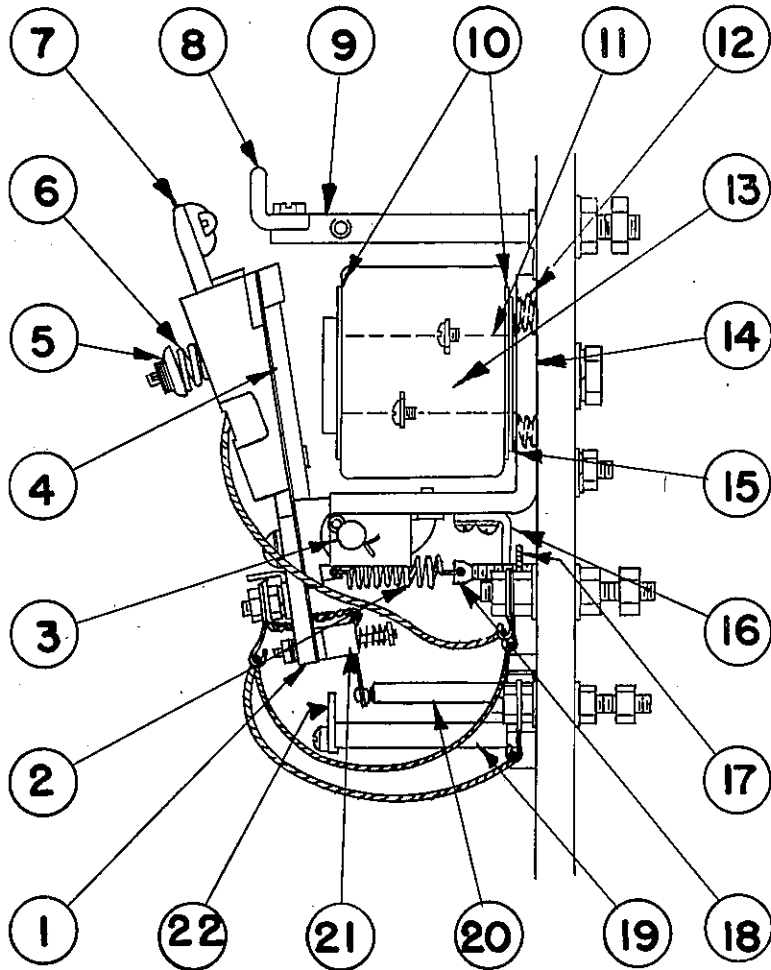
GENERATOR RELAY ASSEMBLY 168700 AUTOMATIC
